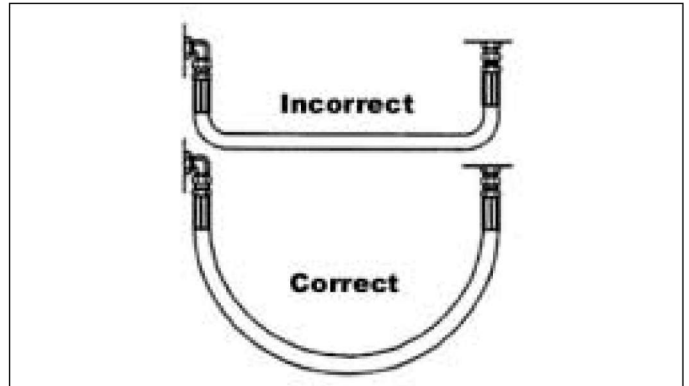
Allow extra hose length to reduce strain on components, to compensate for tolerance stack-up in assemblies and to allow for hose length changes when pressurized.
